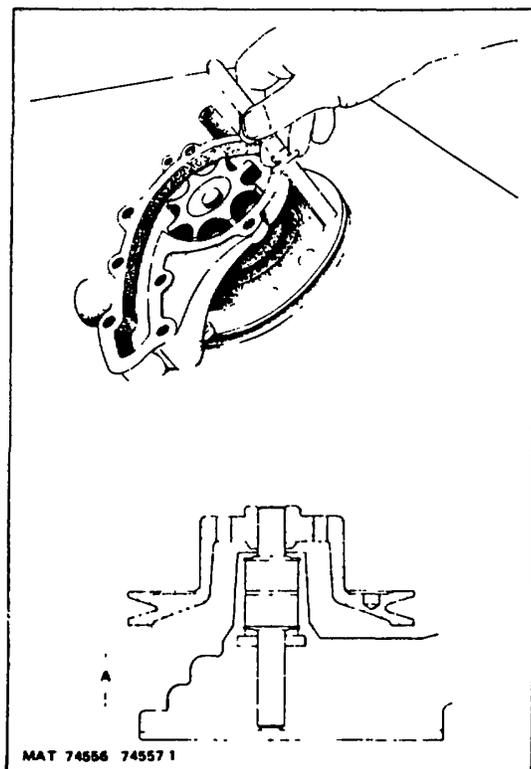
Measuring Distance Between Pump Body and Rear of Pulley Flange.
